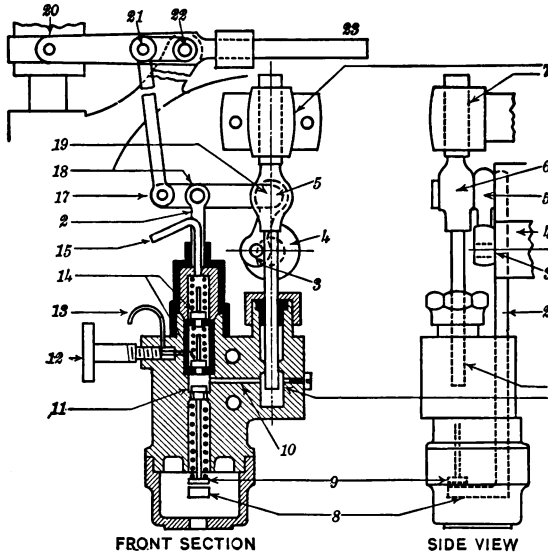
FRONT SECTION FUEL PUMP AND GOVERNOR VALVE GEAR
